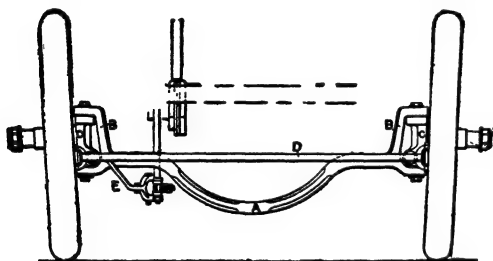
ELEVATION OF AUTOMOBILE FRONT AXLE WITH KNUCKLES, STEERING PIVOT PINS, AND INCLINED WHEEL SHAFTS.
